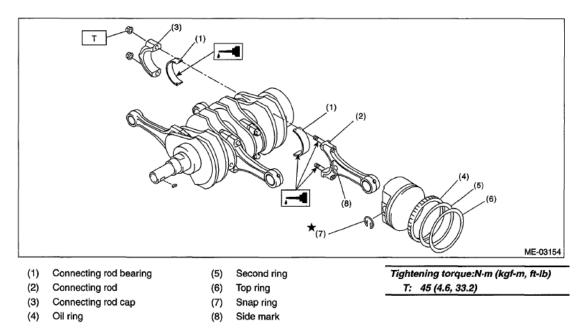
Identifying Connecting Rod Bearing, Connecting Rod And Top Ring With Torque Specification Courtesy of SUBARU OF AMERICA, INC.
